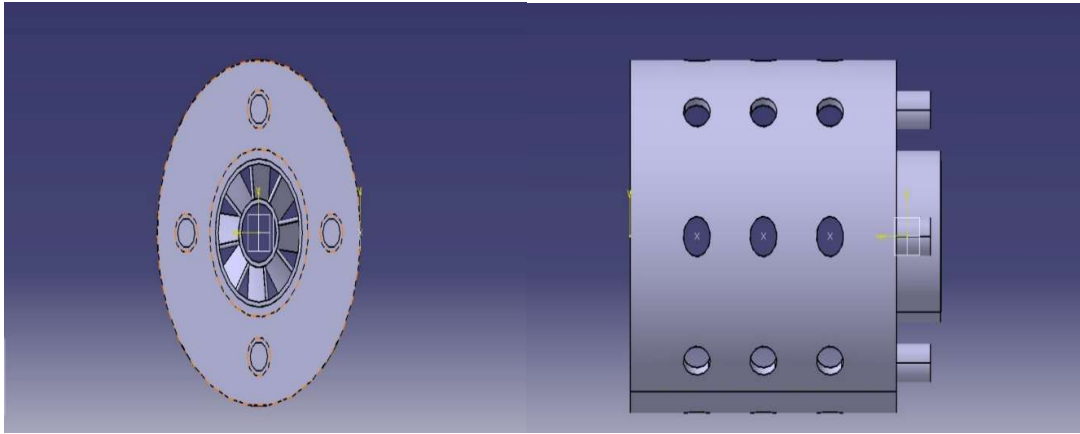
(b) Front and Side Axial Flat Type with Combustion Chamber.
